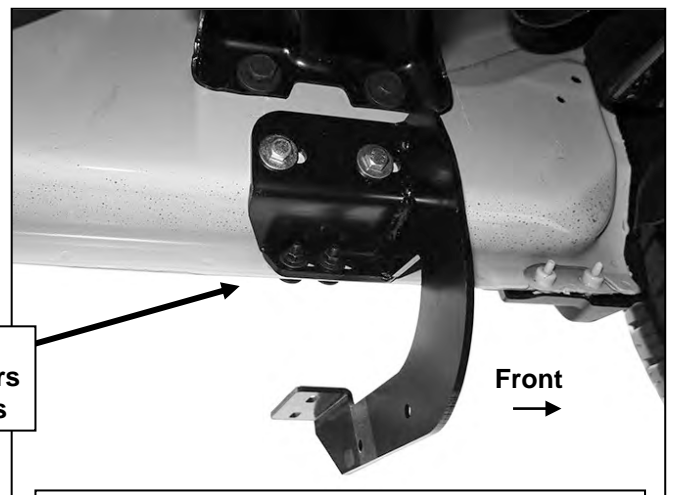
Driver side front models with factory installed threaded inserts. Bolt Plate not required
